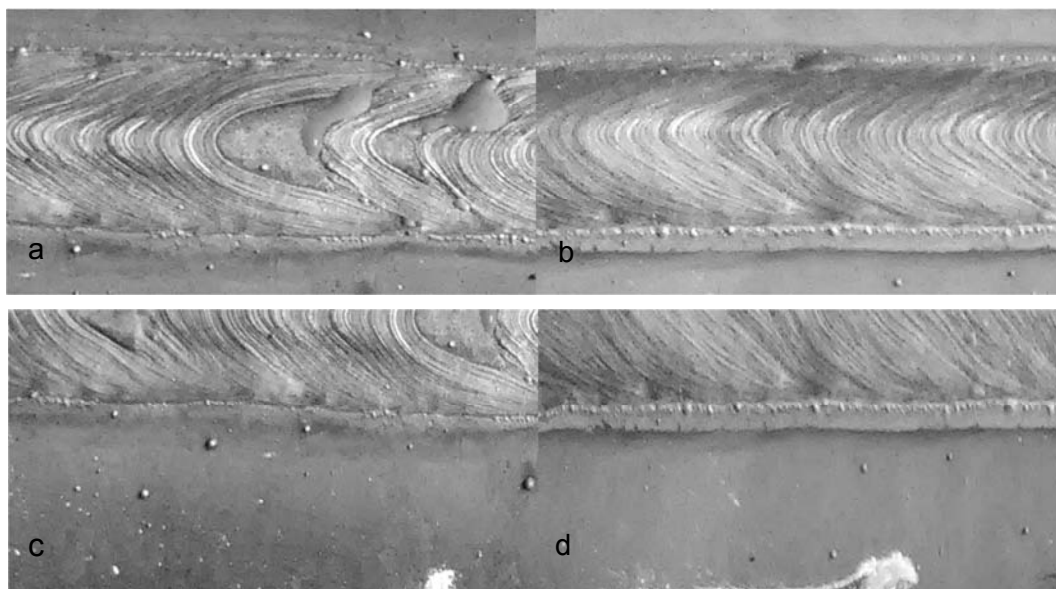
Comparison of bead weld of both samples: a) bead weld A, b) bead weld B,
